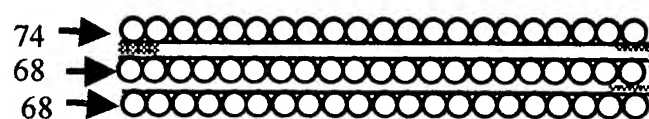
Cross Sectional View Of End Panels And Bottom Panel Folded Into Shipping and Storage Position
